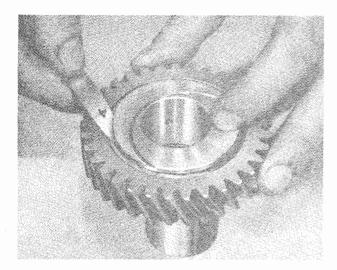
Checking Second Mainshaft Constant Gear for End Float.
